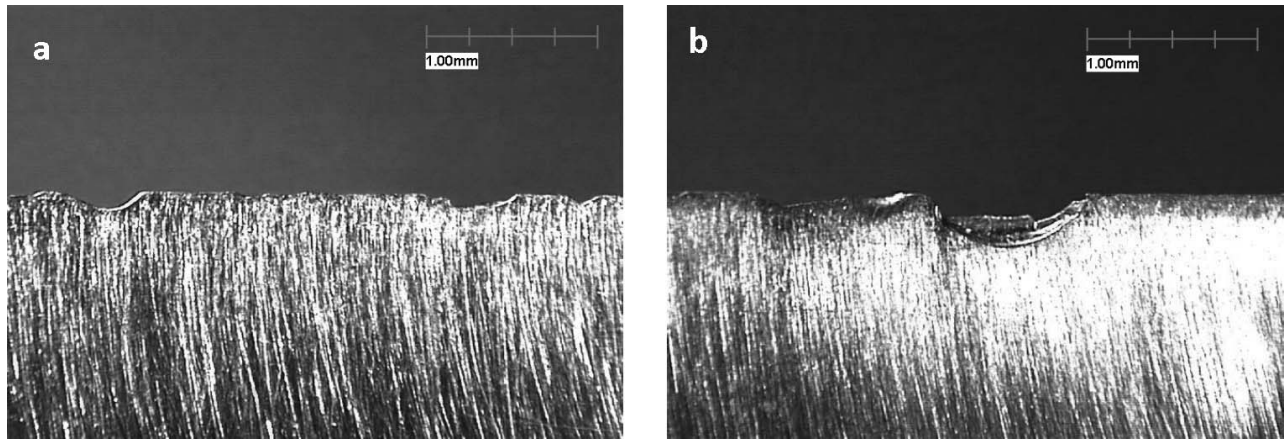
Edge damage in canting knife (a) and chipping knife (b), viewed on the clearance face after 48 hours of machining.
